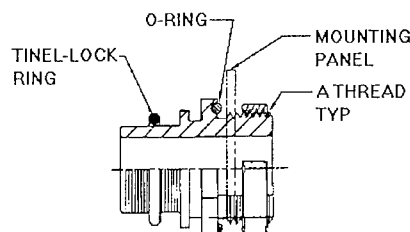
Heat-Recoverable Ring Feed Through Adapter (Drawing Courtesy of Raychem Corp.)
